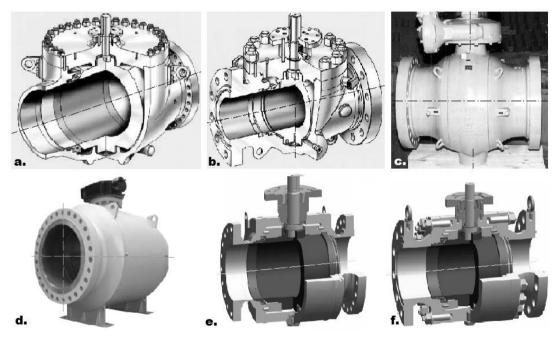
Types of lifting elements mounted on the valves body:a. lugs mounted with screws; b. lifting bolts; c...e. lugs mounted by welding;f. lifting eyes mounted by threading on the end flanges of the valve.
